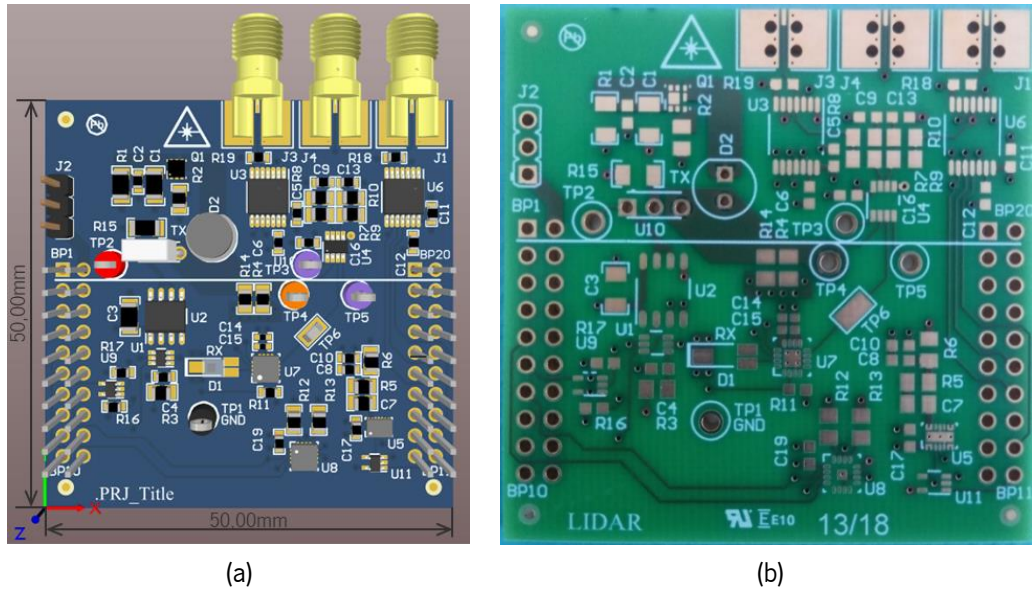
TIDA-00663 PCB layout: (a) top view with components in *Altium* as provided in the *Gerber* files and (b) top view of the printed PCB.
